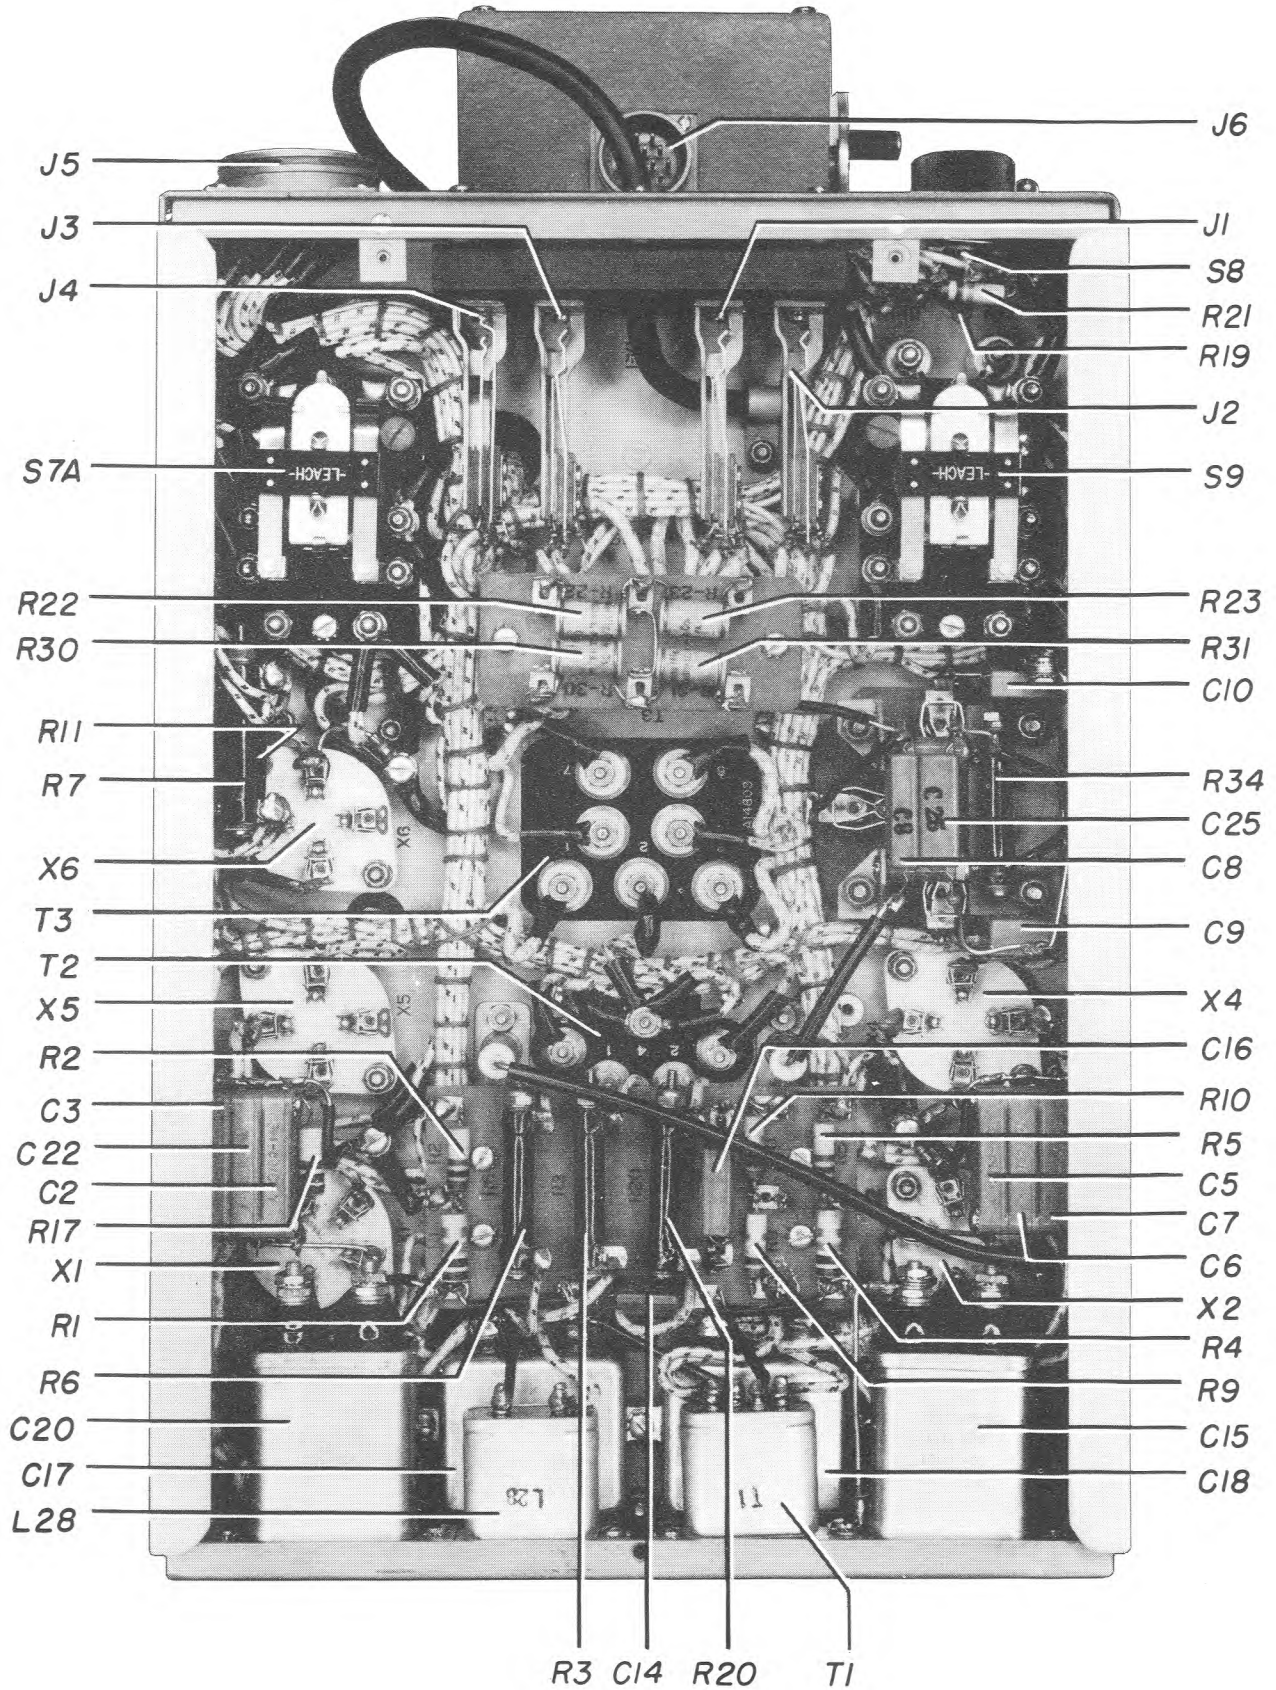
BOTTOM VIEW TRANSMITTER UNIT
